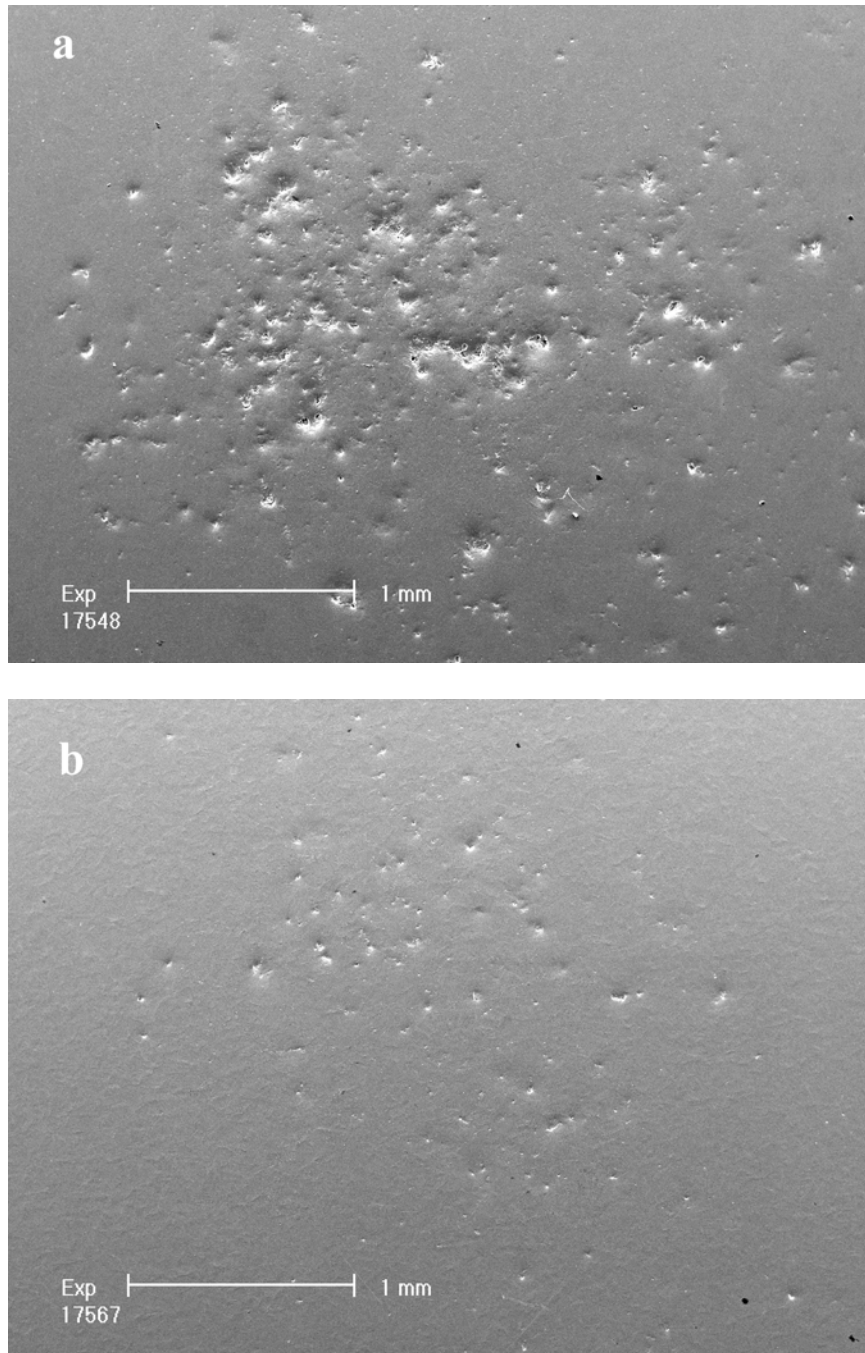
(a) LE3 rear flange and (b) LE4 rear Kolsterised flange, heavily damaged region.
